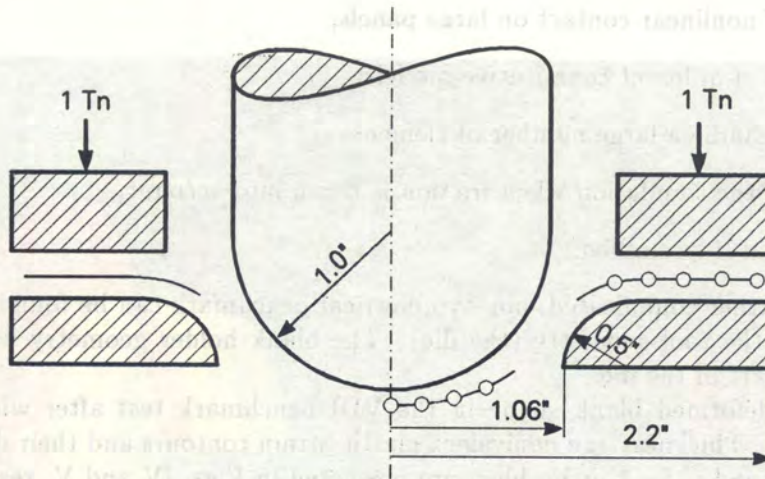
Hemispherical punch deep drawing problem. Geometry of punch and blank
